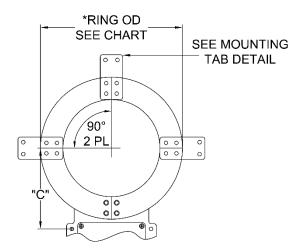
Ring Diameter and Interface Location for 152 to 610 mm [6.00 to 24.00 in] Shafts
